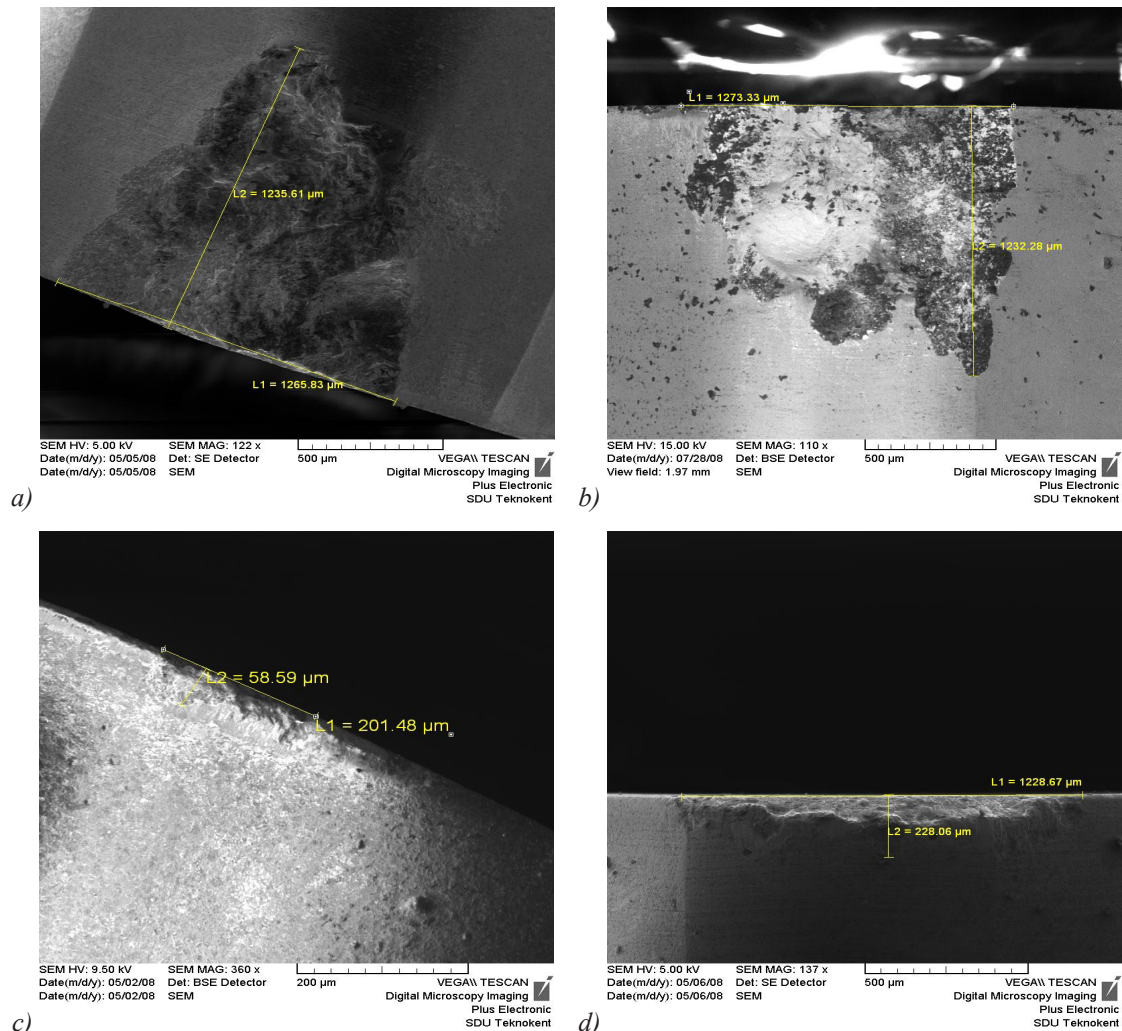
Tool wear SEM photo images; a) Maximum tool wear for six insert CBN tools ($v_c = 154.4$ m/min, $f = 0.15$ mm/teeth), b) Maximum tool wear for six insert Coated Ti(C,N) + (Ti, Al) N + TiN CBN tools ($v_c = 154.4$ m/min, $f = 0.1$ mm/teeth), c) Minimum tool wear for six insert CBN tools ($v_c = 524.5$ m/min, $f = 0.05$ mm/teeth), d) Minimum tool wear for six insert Coated Ti(C,N) + (Ti, Al) N + TiN CBN tools ($v_c = 524.5$ m/min, $f = 0.05$ mm/teeth)
